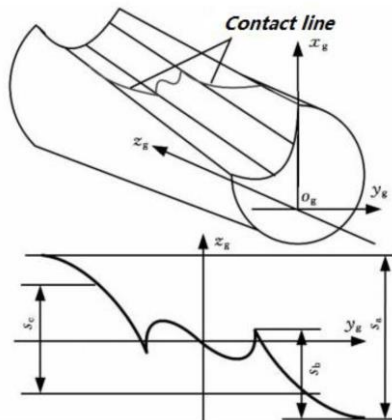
Schematic diagram of the contact line between the form-grinding wheel and the gear
